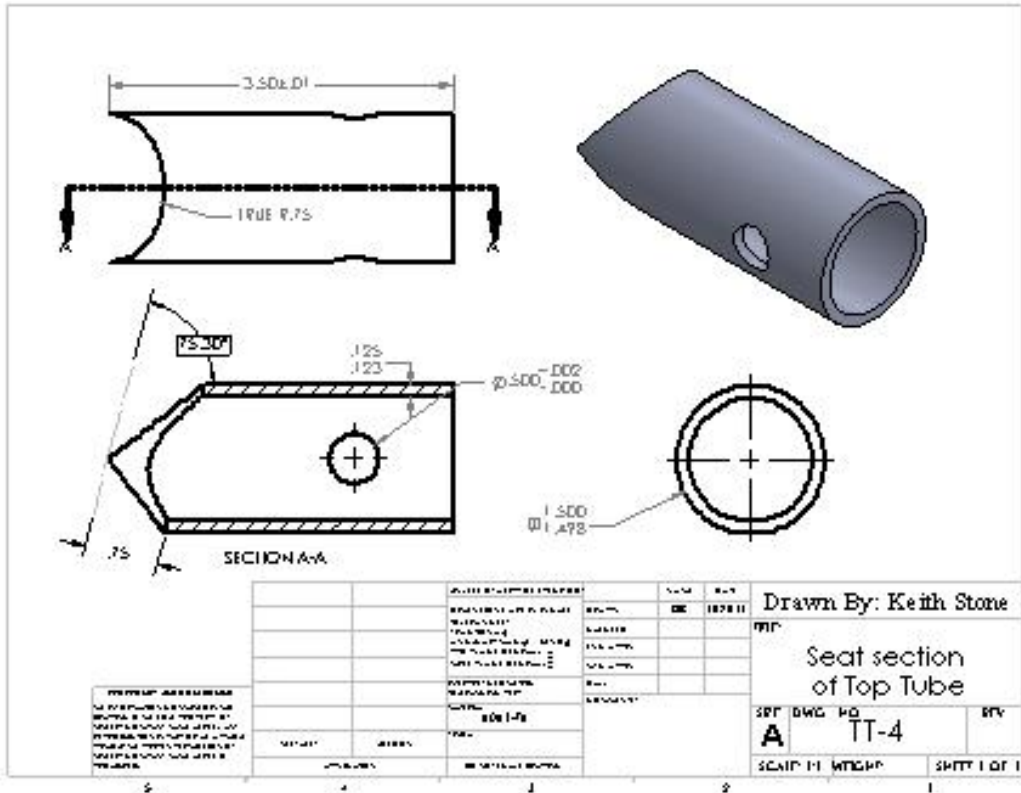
TT-4, Top tube section that is welded to top seat tube.
